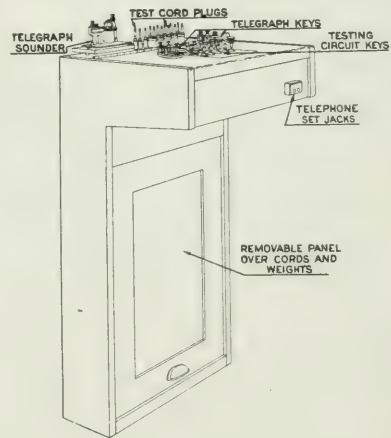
Typical Assembly for Keysheff Equipment Unit for Panel Mounted Test Board
